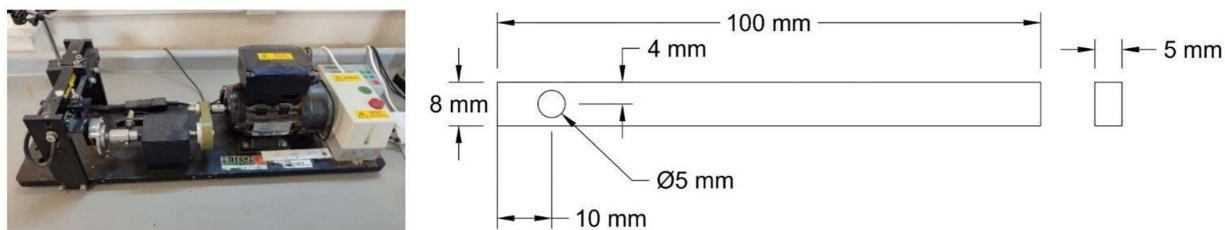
Dimensions of the bending test specimen according to ASTM D790 standard.
